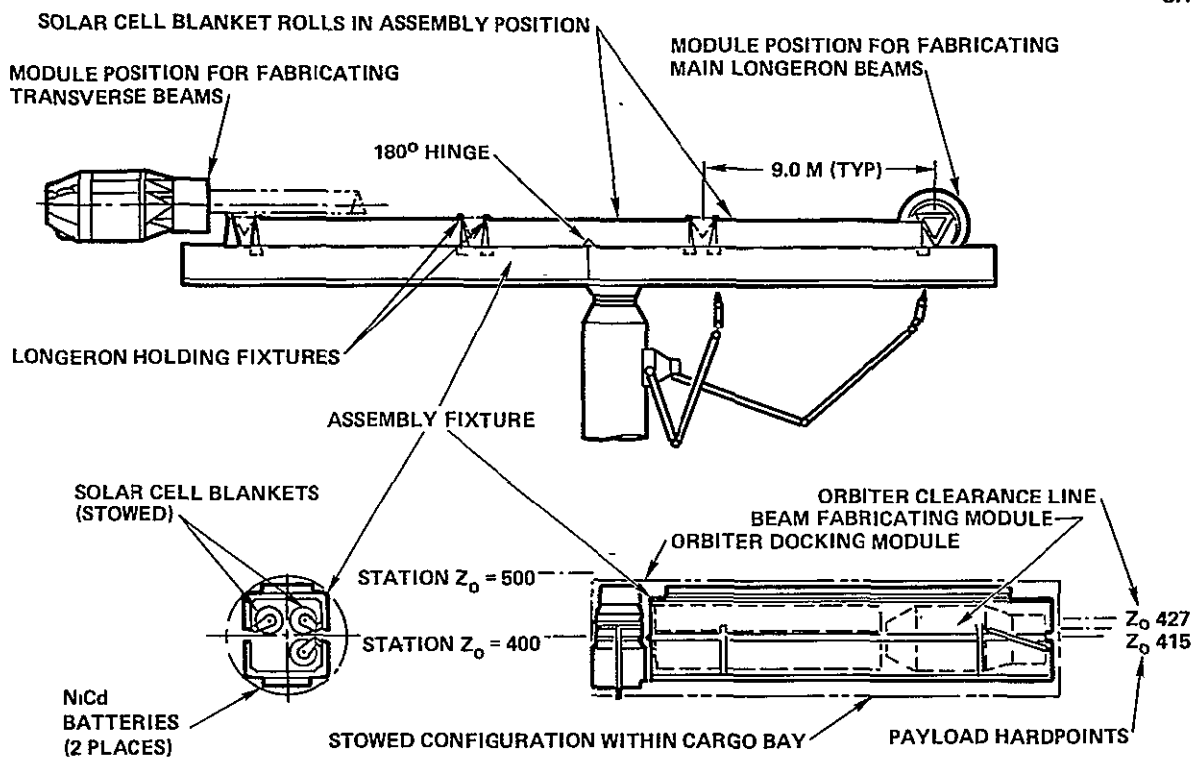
Fabrication and Assembly Tooling for 233-kW Power Platform
